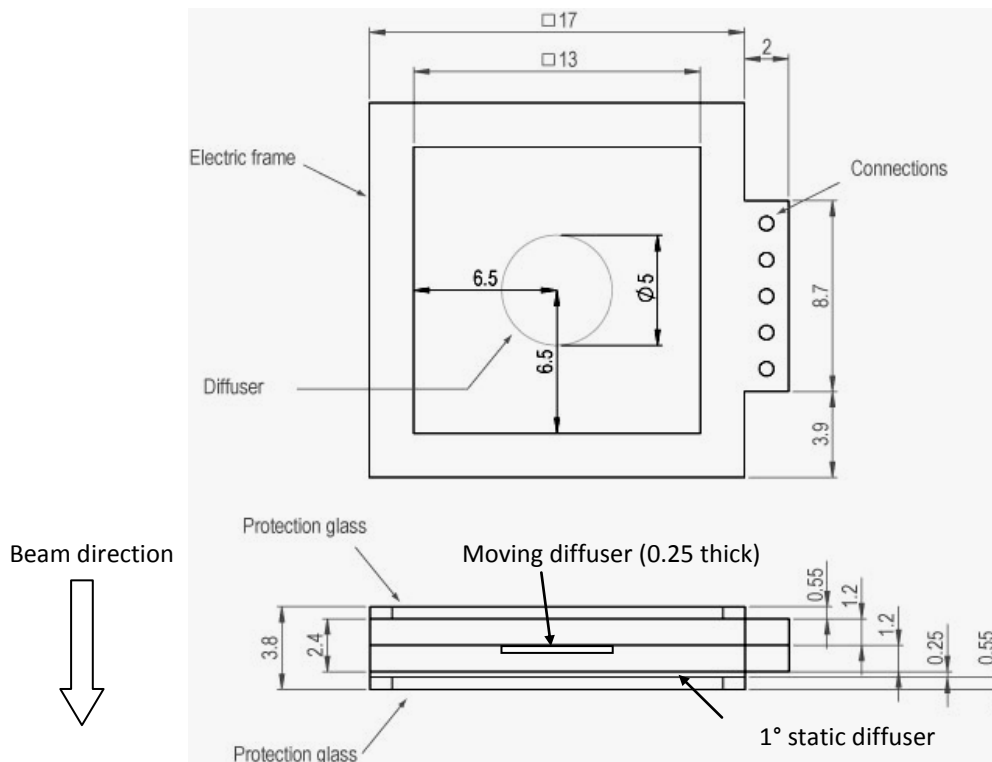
Mechanical drawing of the LSR-OEM (unit: mm)
